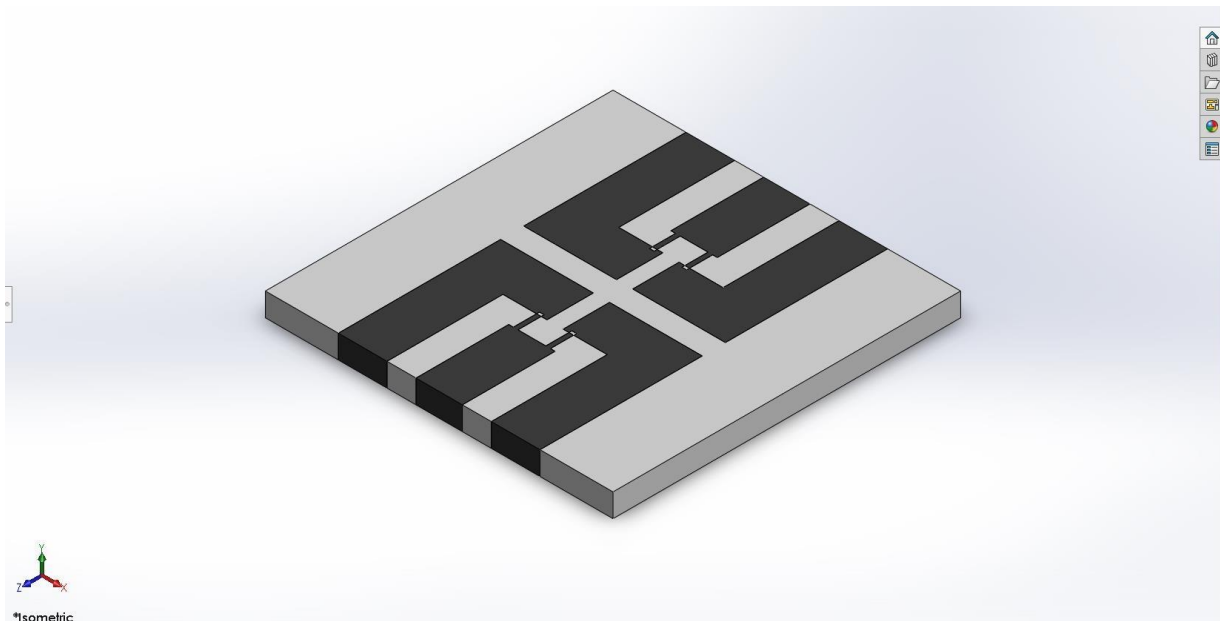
3D view of OLED for the OLED vacuum chamber. The dimensions are 15 mm long, 13 mm wide, and 1mm high. Extrude Boss/Base feature is used, and the sketched outline is extruded to a height of precisely 1 mm.
